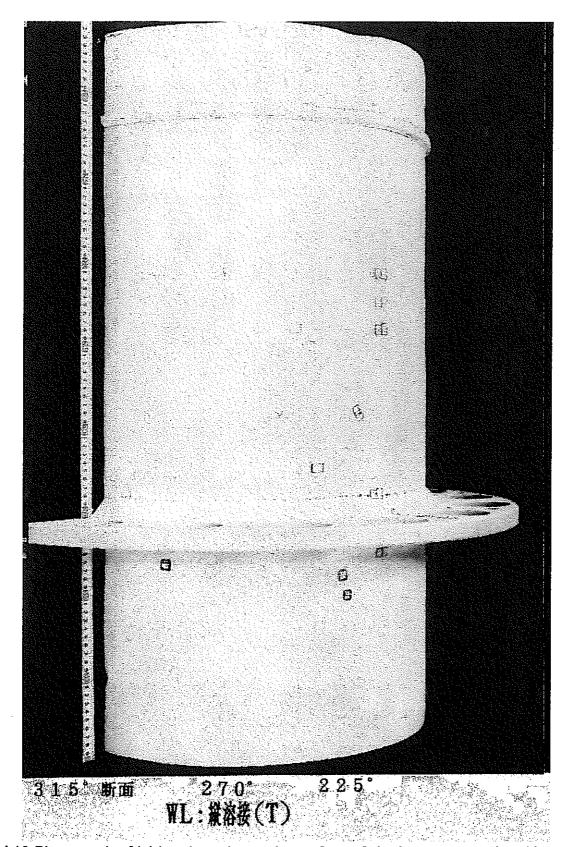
Photograph of initiated cracks on the surface of the inner vessel after 1055 cycles (316FR 225° - 315° ref: Fig.A4.1)
